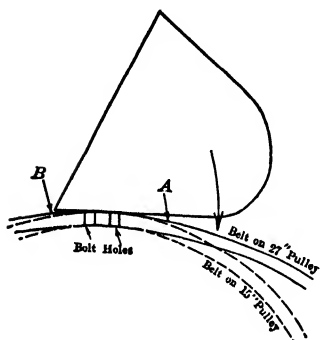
Better Support of Bucket on Foot Wheel of Large Diameter.
